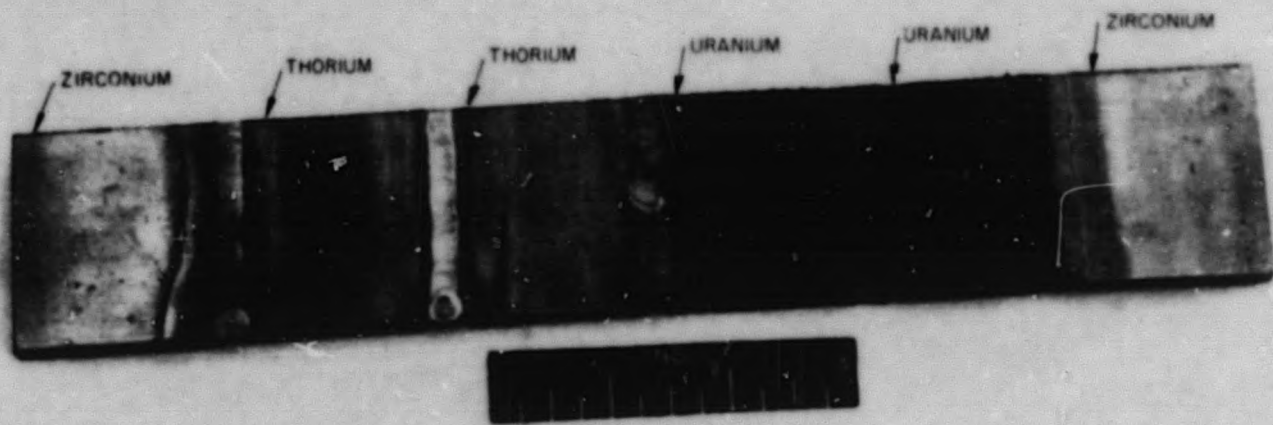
Welds of 1/4-in. Test Plates of Thorium, Zirconium, and Uranium.
